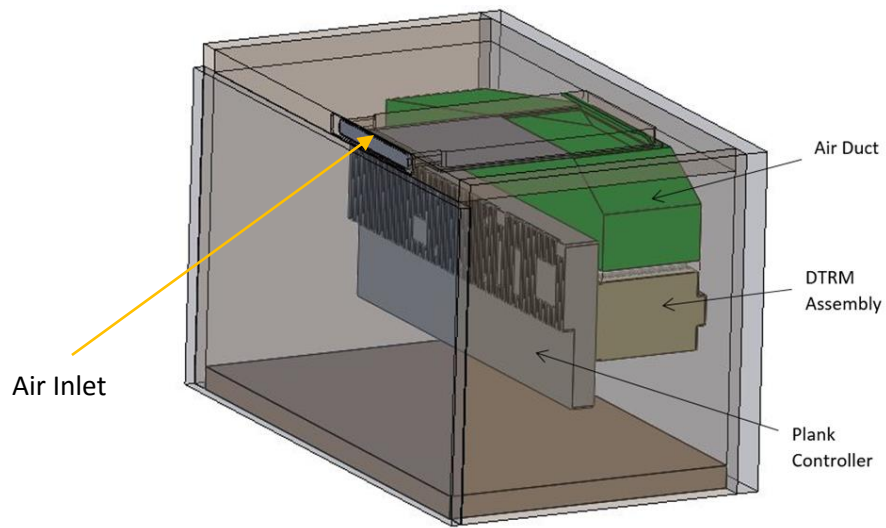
View showing the arrangement of DTRMs, Plank Controller, and Ducting arrangement.
